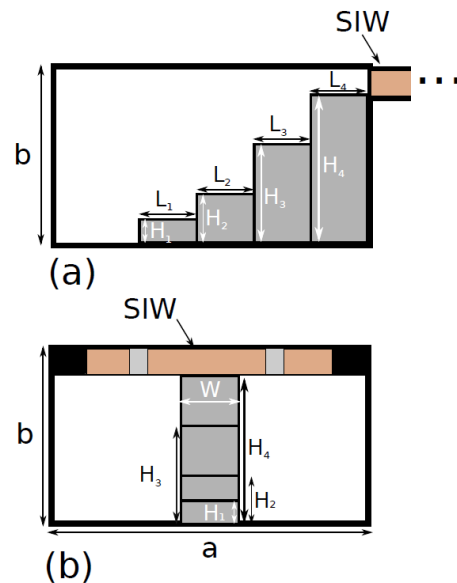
Dimensions of the design. (a) Longitudinal view. (b) Cross section.
